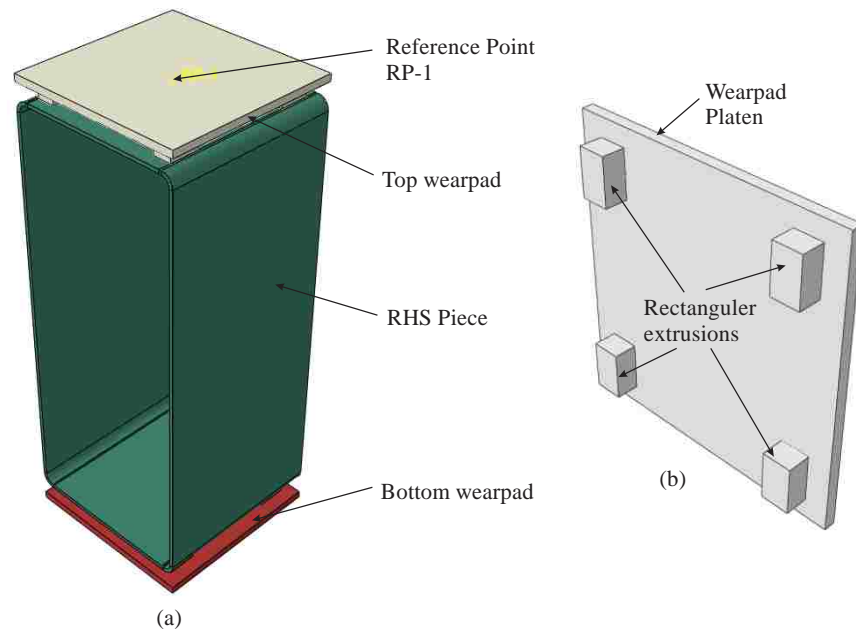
(a) RHS ring between wearpads assembly (b) Wearpad parts
